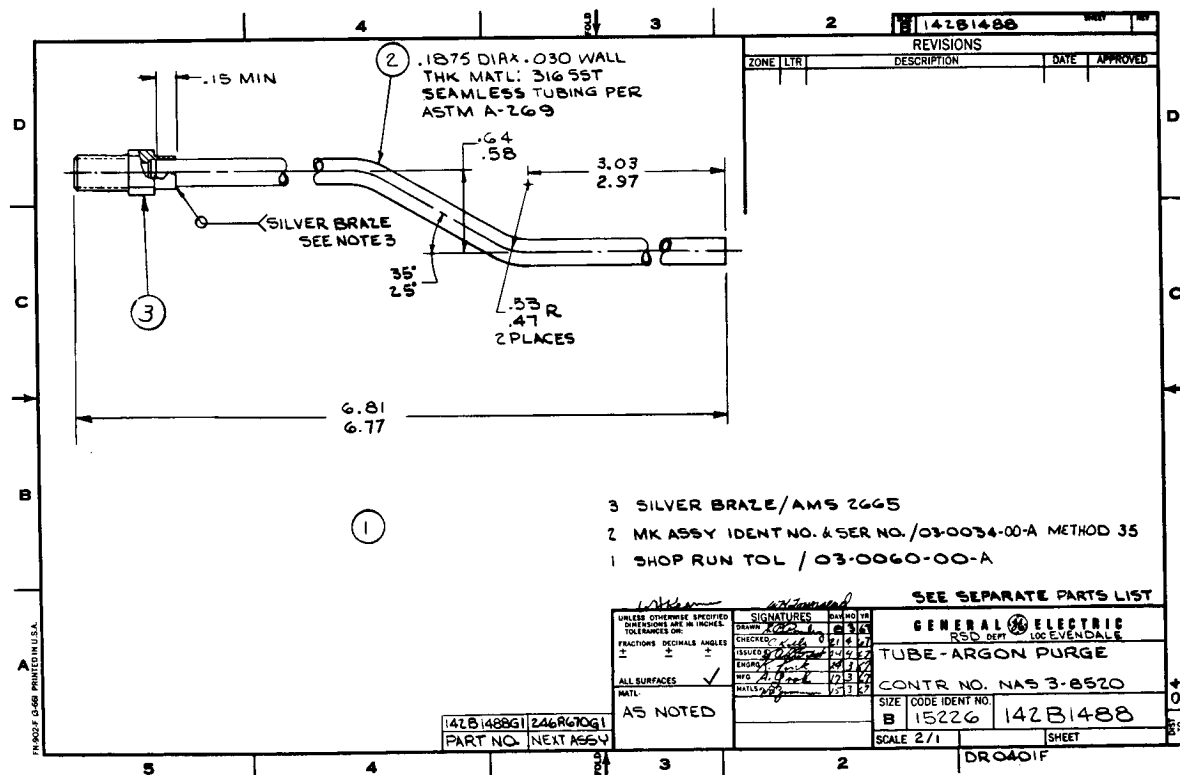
Argon Purge Flow Feed Tube for Region Behind Pad Bearing.
